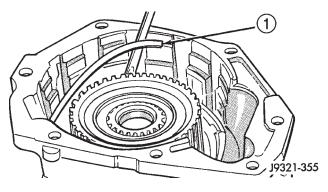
Overdrive Clutch Wave Spring Removal/ Installation
